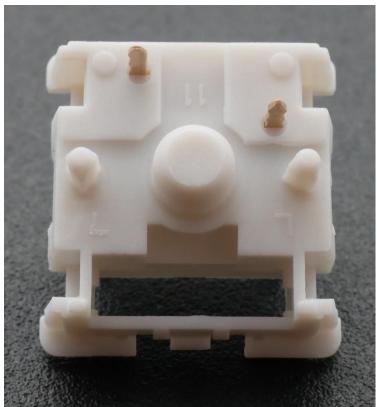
Cookies n' Cream bottom housing exterior showing unique three mold marking design.
